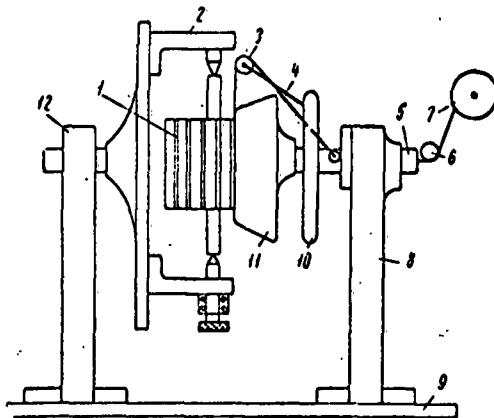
Schematic diagram of the machine with stationary stator. 1) Stator; 2) centers; 3) roller; 4) arm; 5) hollow shaft; 6) roller; 7) spool with wire; 8) headstock; 9) base of machine; 10) pulley; 11) guiding sidepieces; 12) tailstock.
